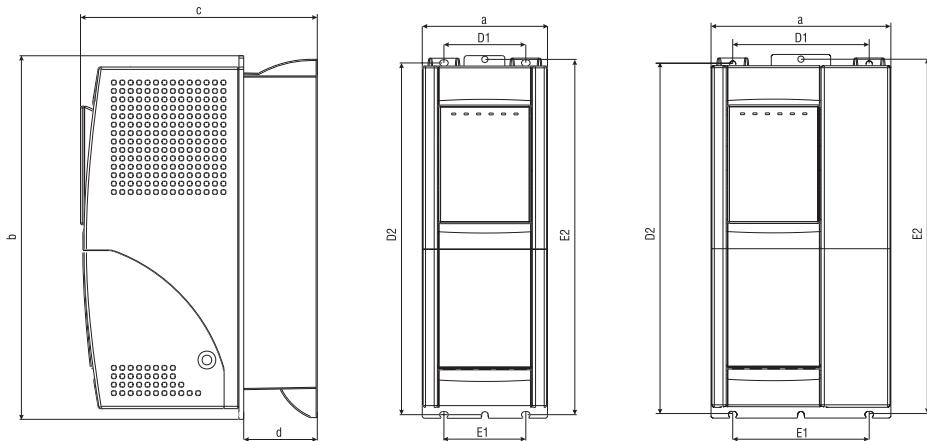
Mounting Methods (Sizes 1007 ... 3150)
